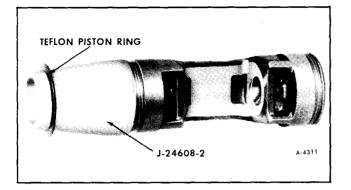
Teflon Piston Ring Positioned on Ring Installer Guide
